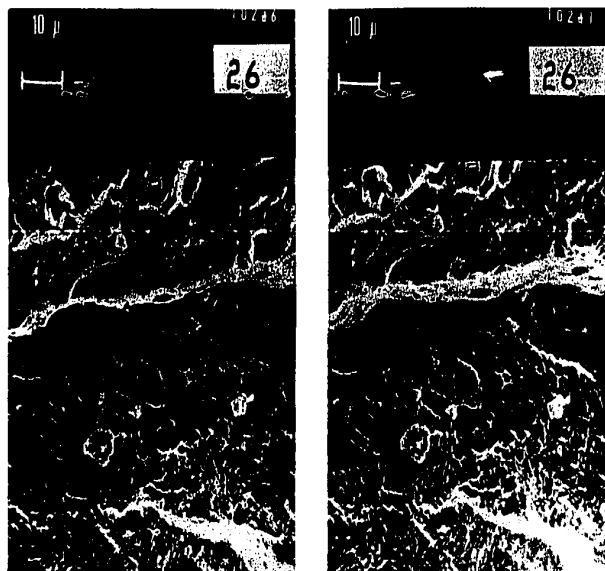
Fracture surfaces produced in dry hydrogen: stress = 93,800 psi (stereo pair)
